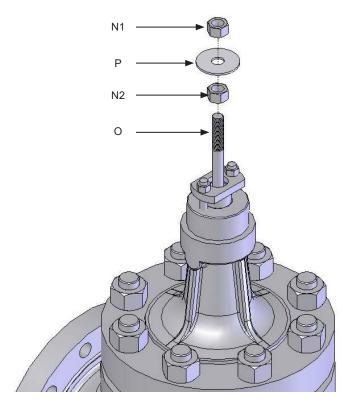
Thread Indicator Washers and Nuts onto Valve Stem
